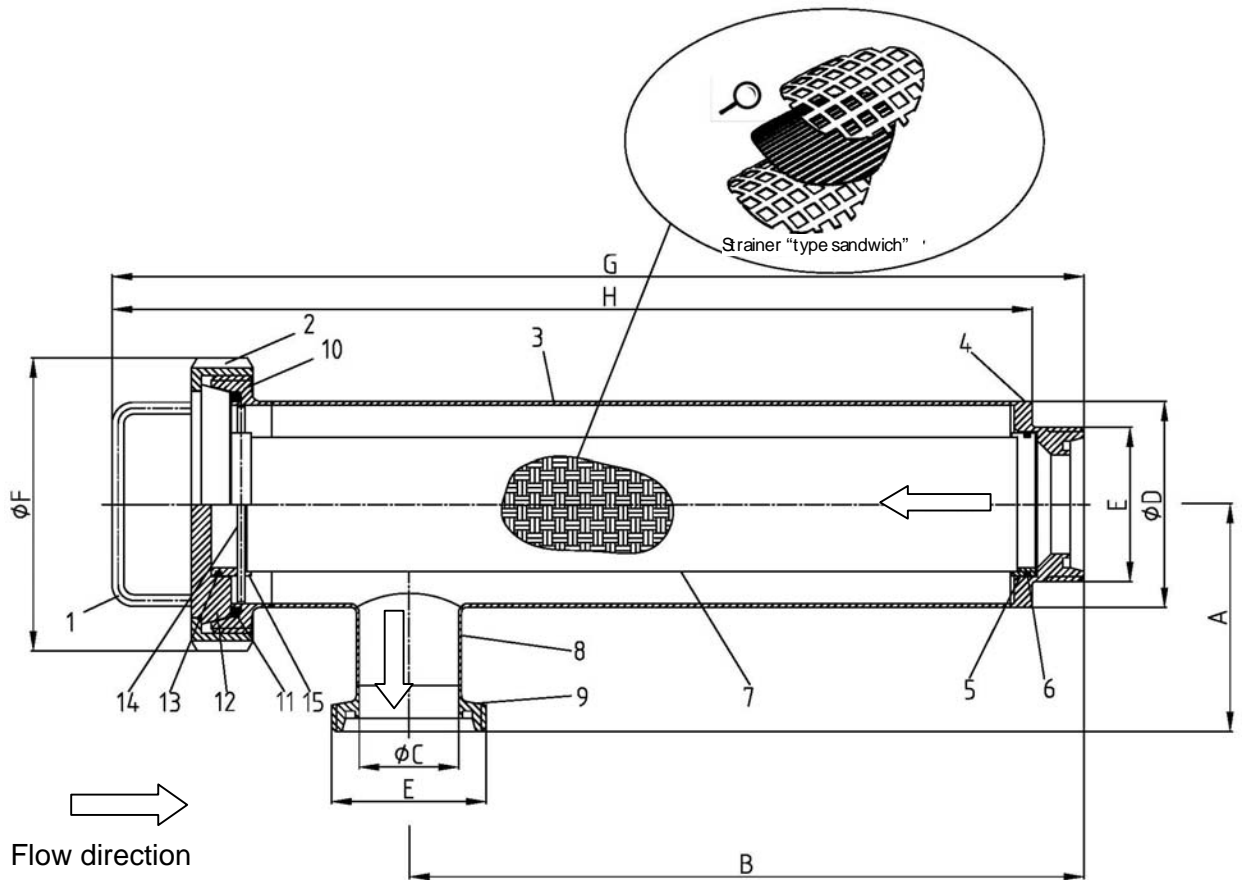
Sectional view of the angular filter type GG Sandwich (dimensions see chapter 10.1)
